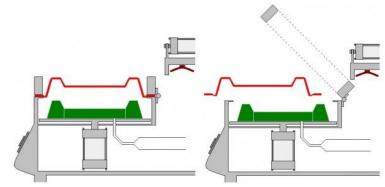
The mould is placed down & Figure 34b: The vacuum formed shape can be taken out (Agulon Kunststoffen, n.d.)
